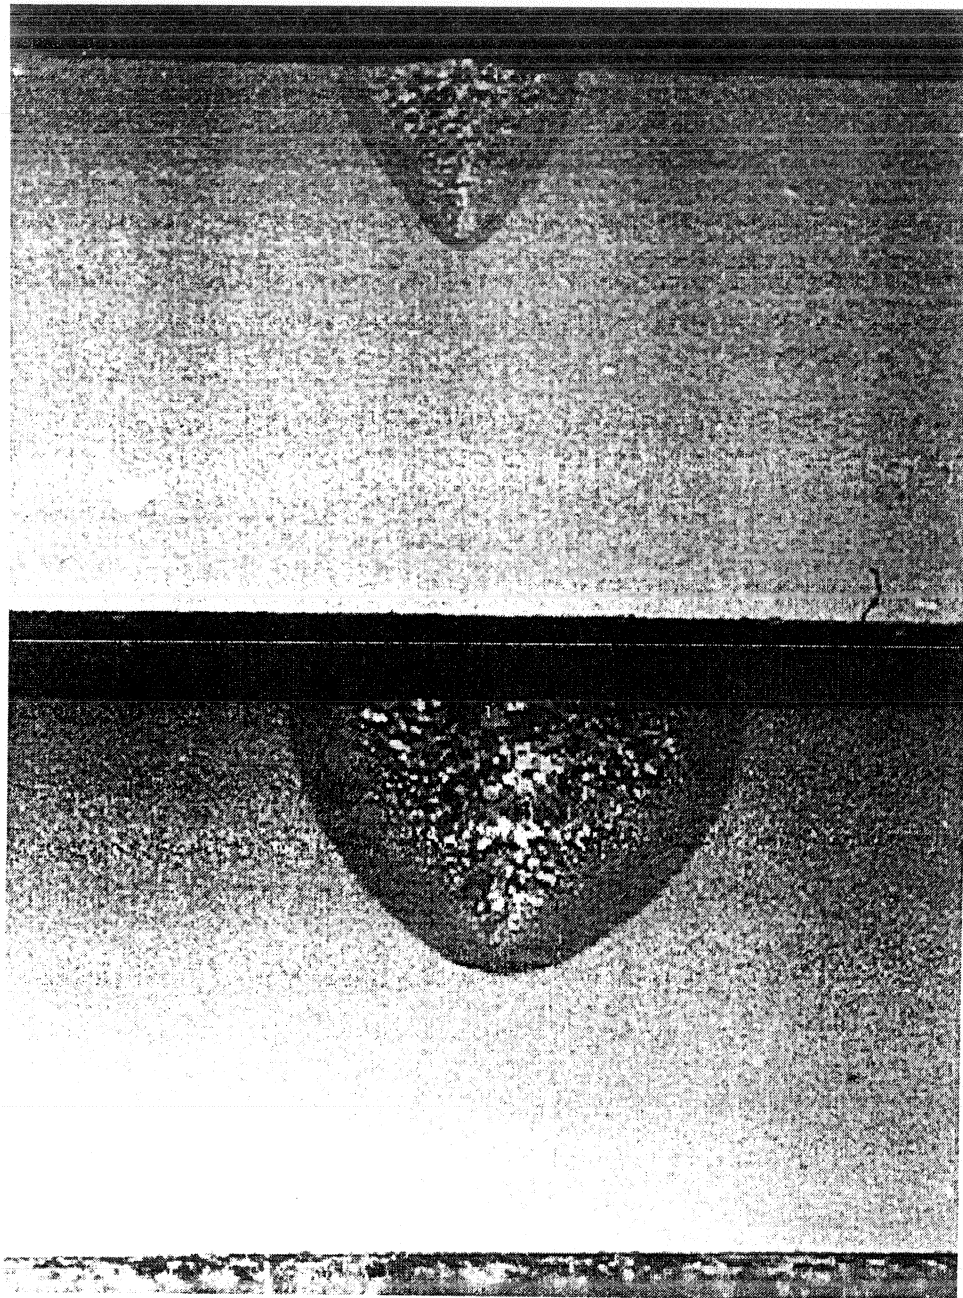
Different types of defects which can occur in laser welding.
